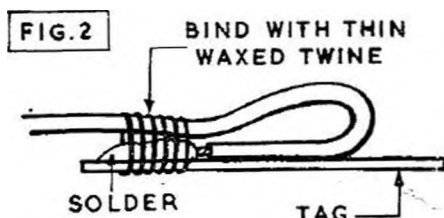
Vibration-proof wiring joint. Use for all connections to batteries, switches, meter sockets, receiver power sockets etc.
